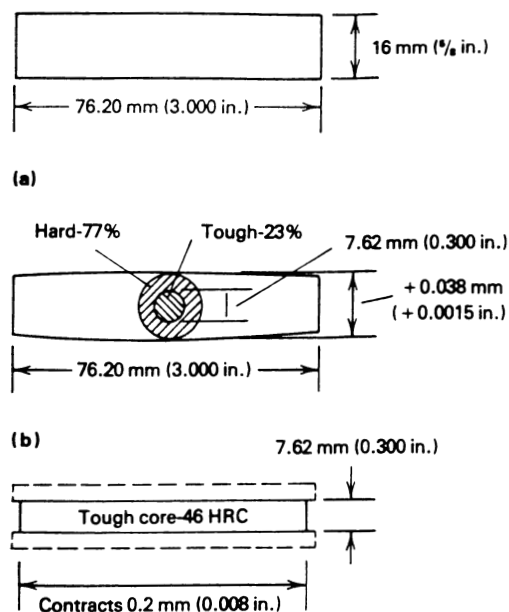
Strains produced by hardening a 1.1% C tool steel cylinder. (a) Dimensions of an annealed bar before quenching. (b) Hardness. (c) Core hardness after water quenching; cylinder diameter reduced from 16 to 7.62 mm (0.6 to 0.3 in.) by wet grinding
